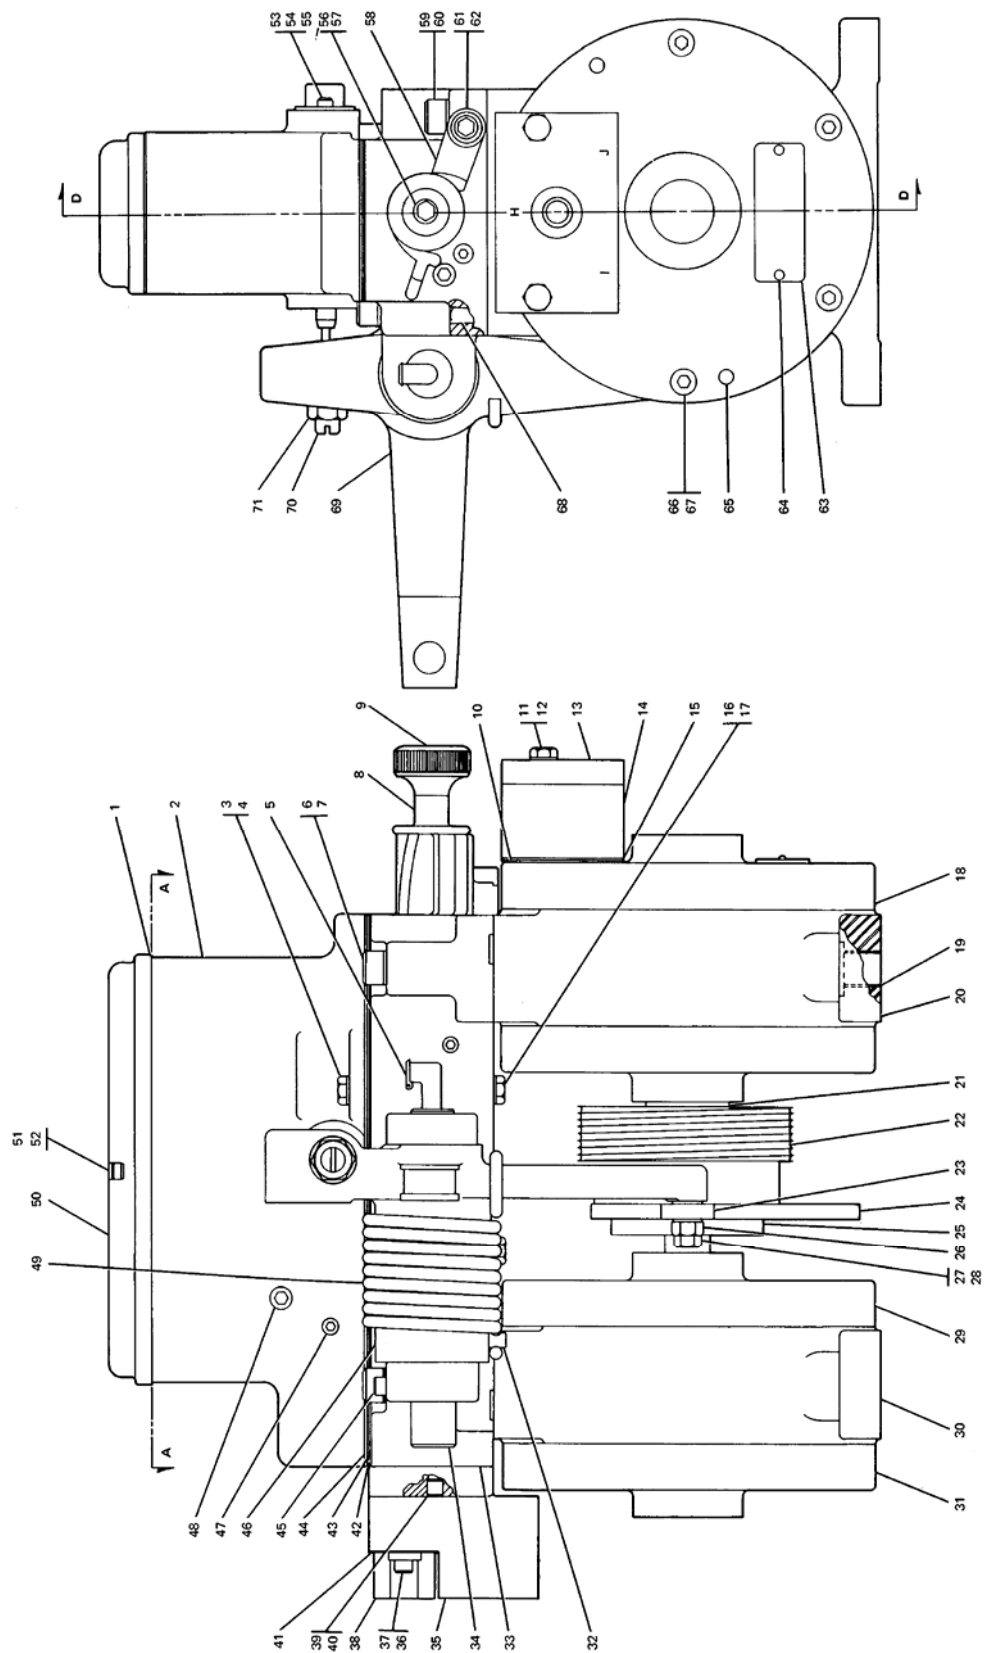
Pitch Control Assembly Parts (1 of 2)
